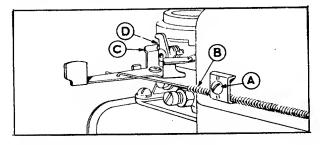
THROTTLE CONTROL ADJUSTMENT
